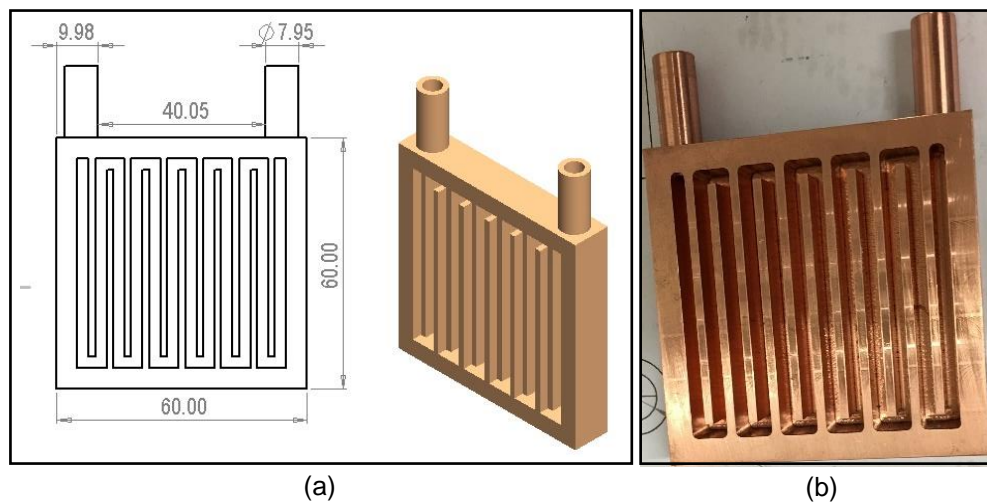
Inner view of the heat exchanger used for solar cells cooling designed by the Mechanical Workshop at Cardiff University: (a) CAD drawing and (b) photograph. (Dimensions in the CAD drawing are in mm).
